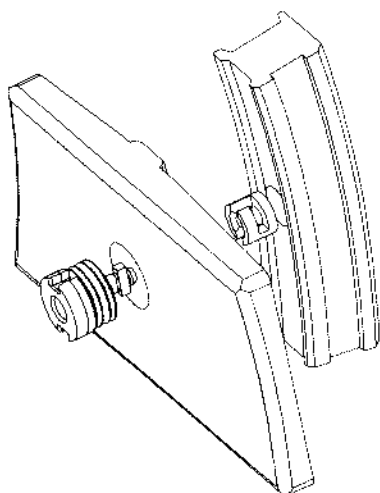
Exploded view of the RFX graphite tile clamping system.
